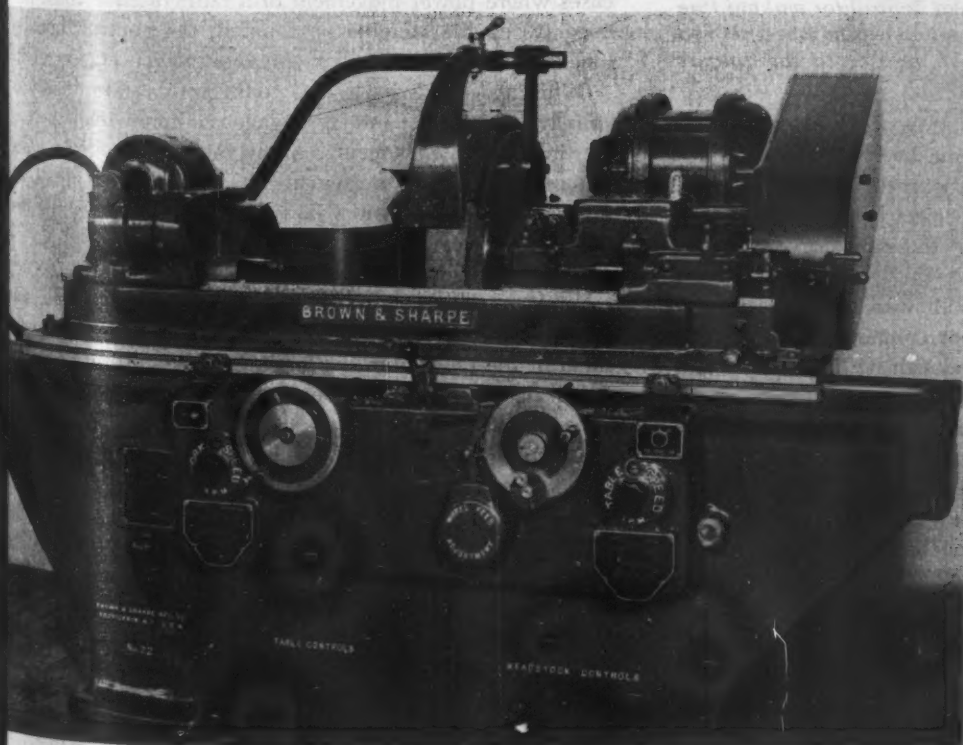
Left—Crossfeed handwheel on this machine can be used to control headstock, coolant flow and table traverse in addition to feeding grinding wheel into the work
